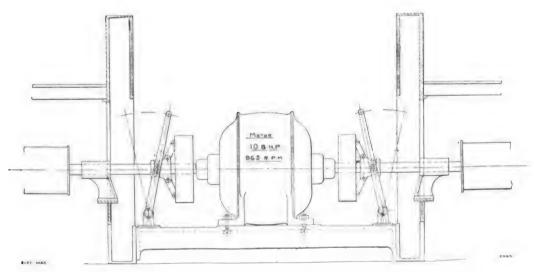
MECHANICAL ARRANGEMENT OF DRIVE FOR TWO RING FRAMES BY MOTOR COUPLED DIRECT.
